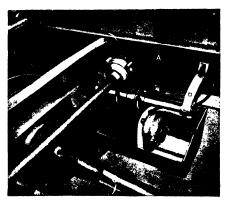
Driving from Cardan shaft, which is the only method possible in a few cars, including Rolls-Royce, prior to Chassis Series 1,700.
